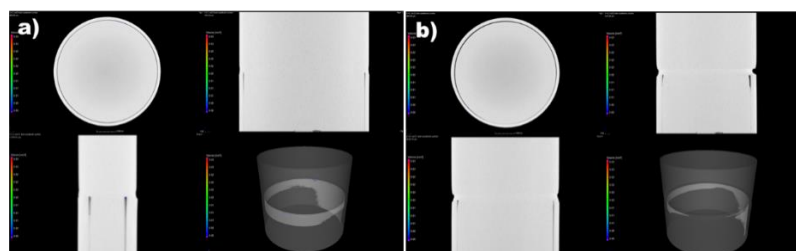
Examples of X-ray CT inspection: The fracture stress is a) 659 MPa and b) 347 MPa.
